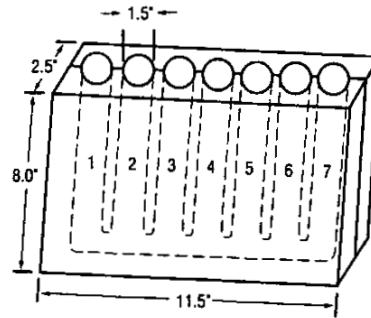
Configurations of permanent steel molds and fracture toughness specimens used for testing the effects of hot isostatic pressing (HIP) (Ref. 58)
